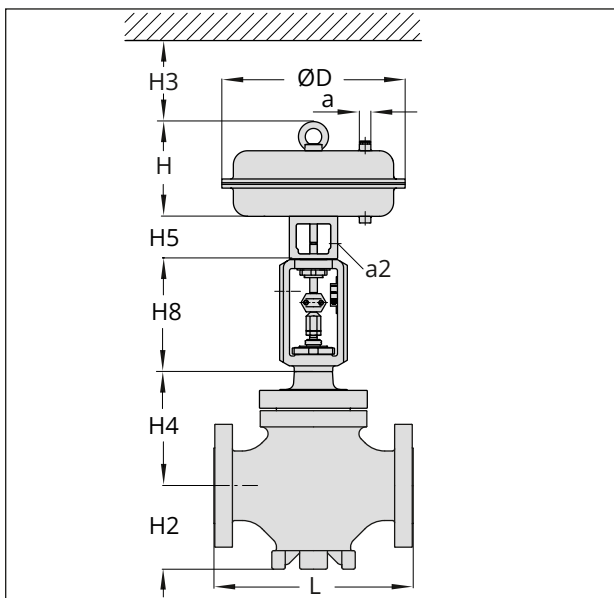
Type 3251-7/3251-AM-7 (Type 3251/3251-AM Valve with Type 3277 Pneumatic Actuator)
